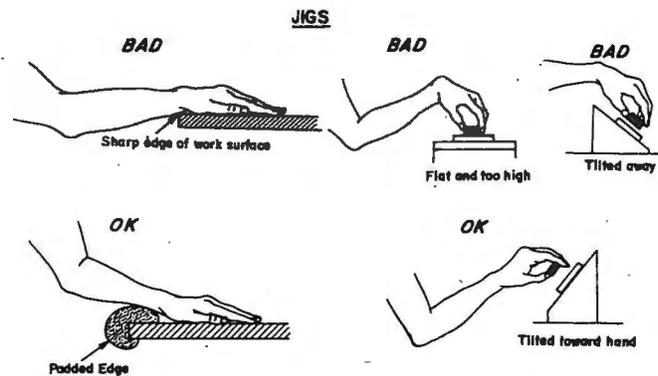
Jigs should be located and oriented so that parts can be assembled without flexing the wrist.
